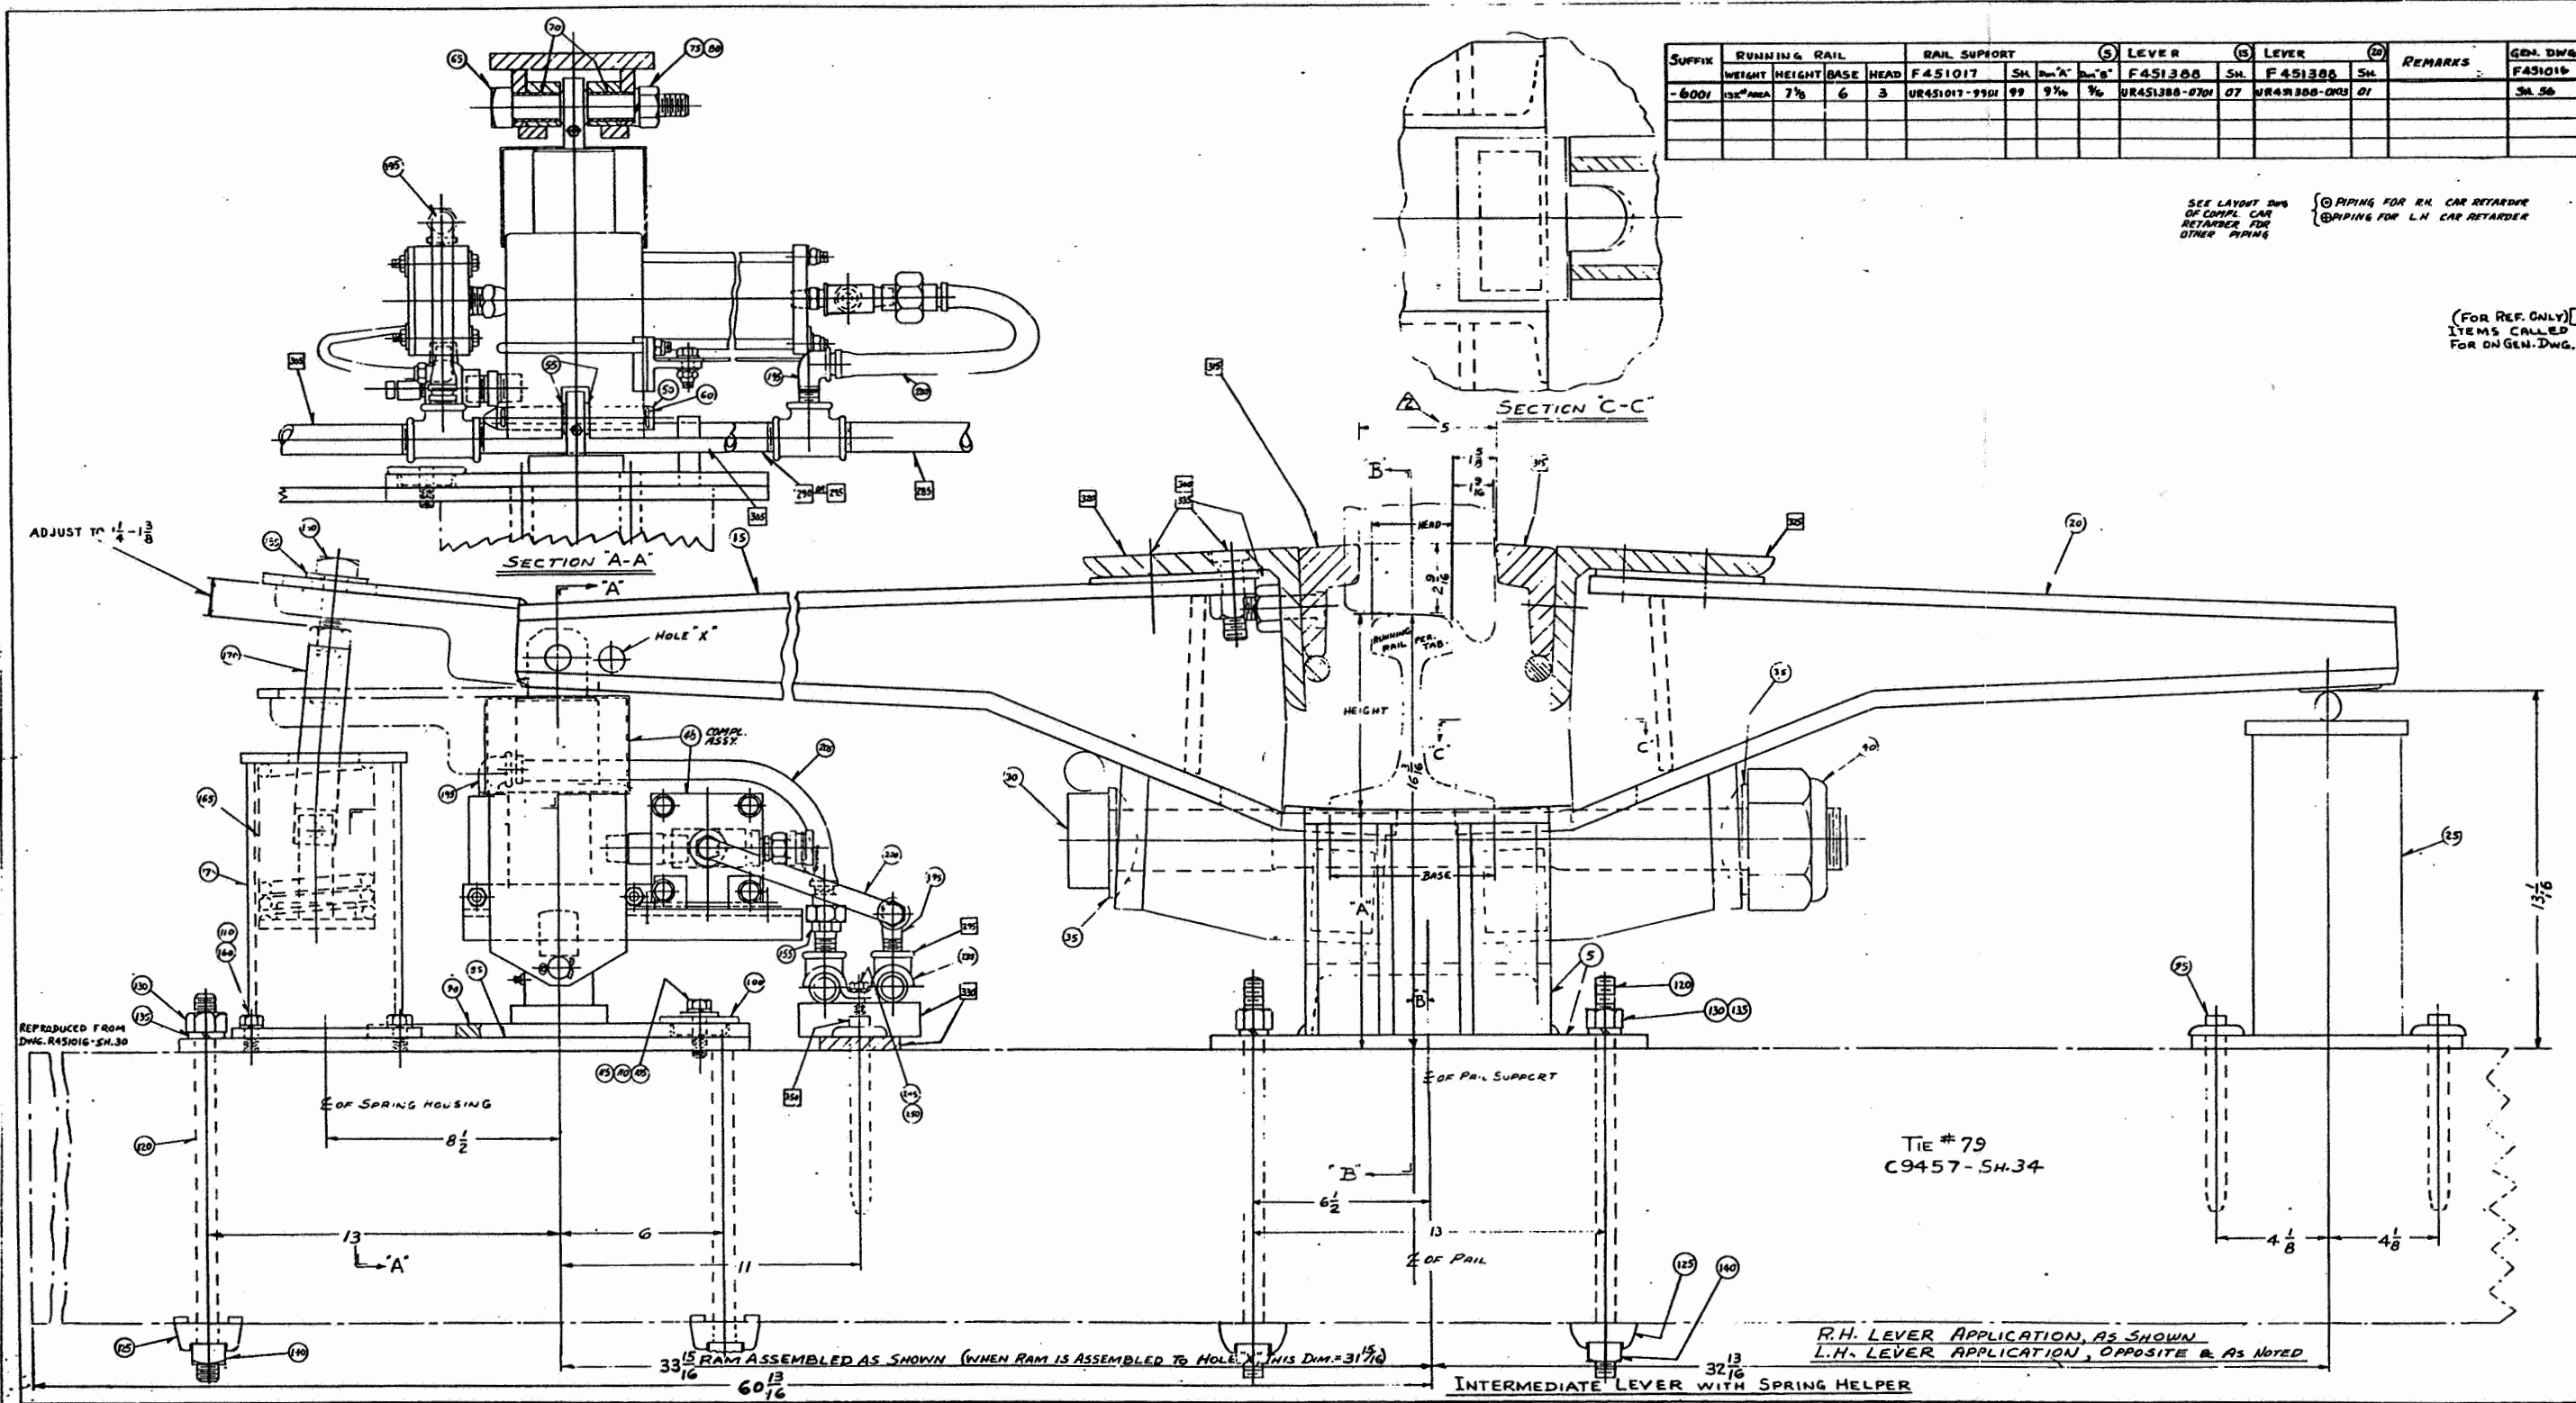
INTERMEDIATE LEVER ASSEMBLY (with helper springs), LOCATORS
